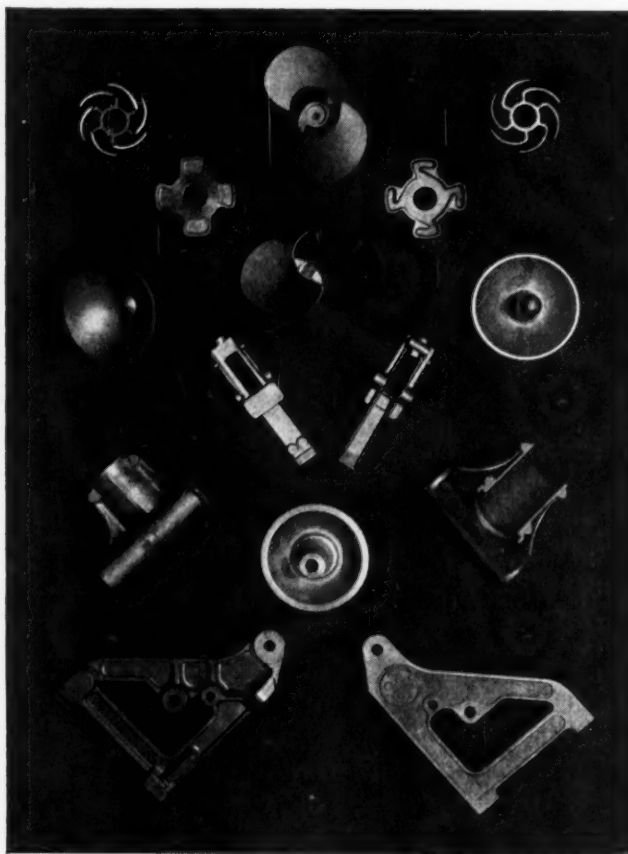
Die-castings of Aluminum Bronze Made by a Process in which the Molten Metal is Drawn into the Die by Vacuum
